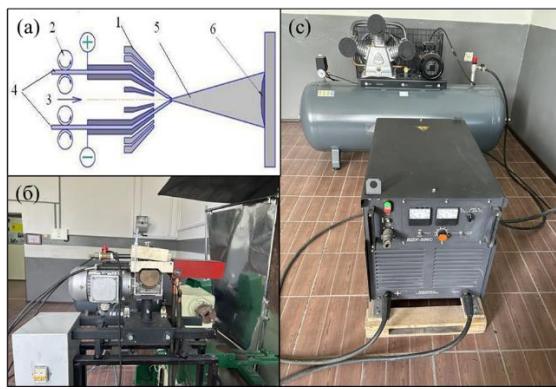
a) Flow chart of electric arc metallization (1 – metallizer body; 2 – wire feed mechanism; 3 – air supply channel; 4 – electrode wires; 5 – electric arc with sprayed wire particles; 6 – sprayed coating) b) external view of the gun; c) external view of the source and compressor.
